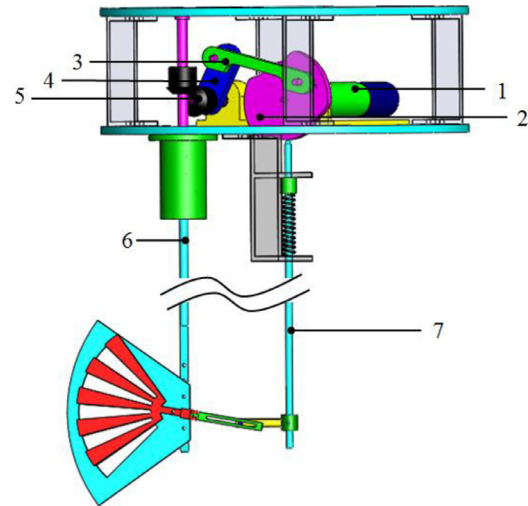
Sketch of the driving module. 1. motor, 2. crank-cam, 3. middle rod, 4. rocker, 5. bevel gear, 6. pitching rod, 7. slide rod.
